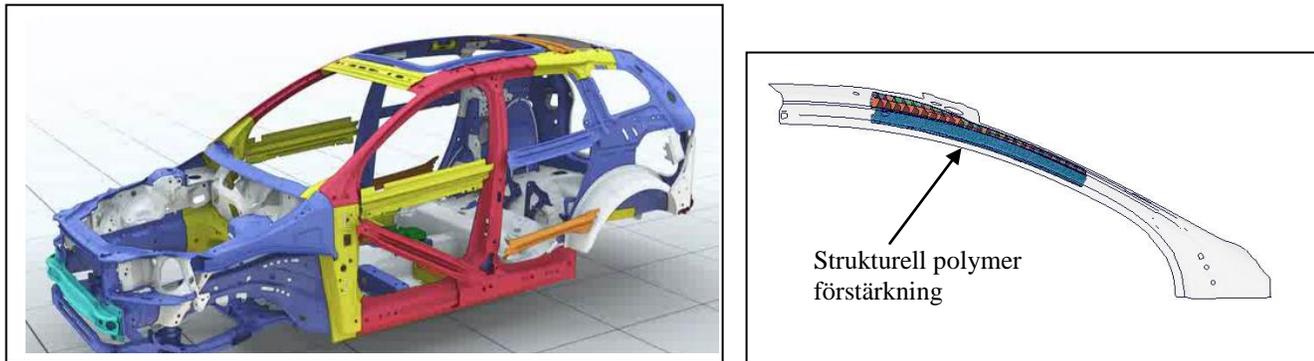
Structural polymer reinforcement in back-up structure, a-pillar.
